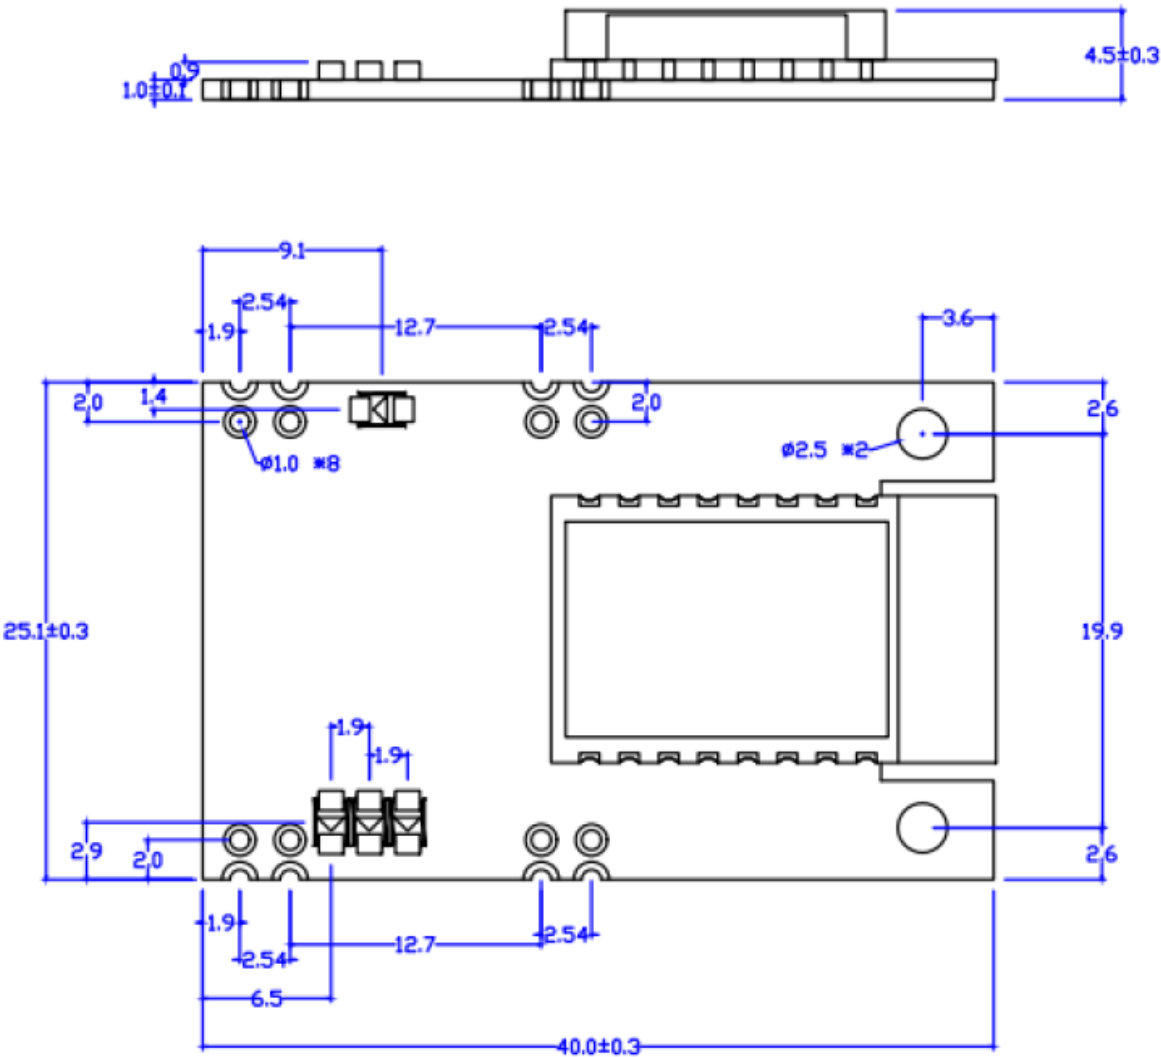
Wport-W71-1/0(2M) Mechanical Dimensions
